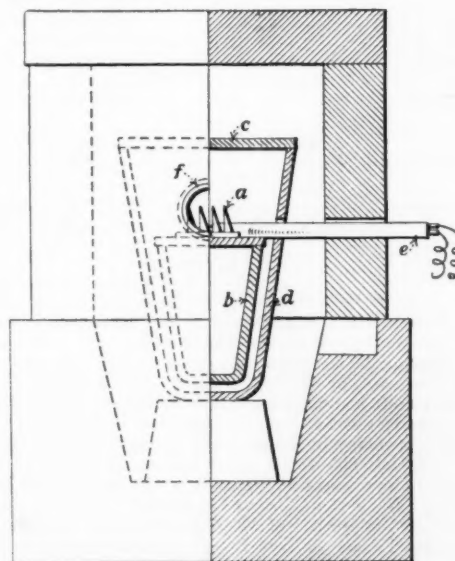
ELEVATION AND SECTION OF NO. 3 MELTER'S FURNACE ARRANGED FOR FUSION TESTS
